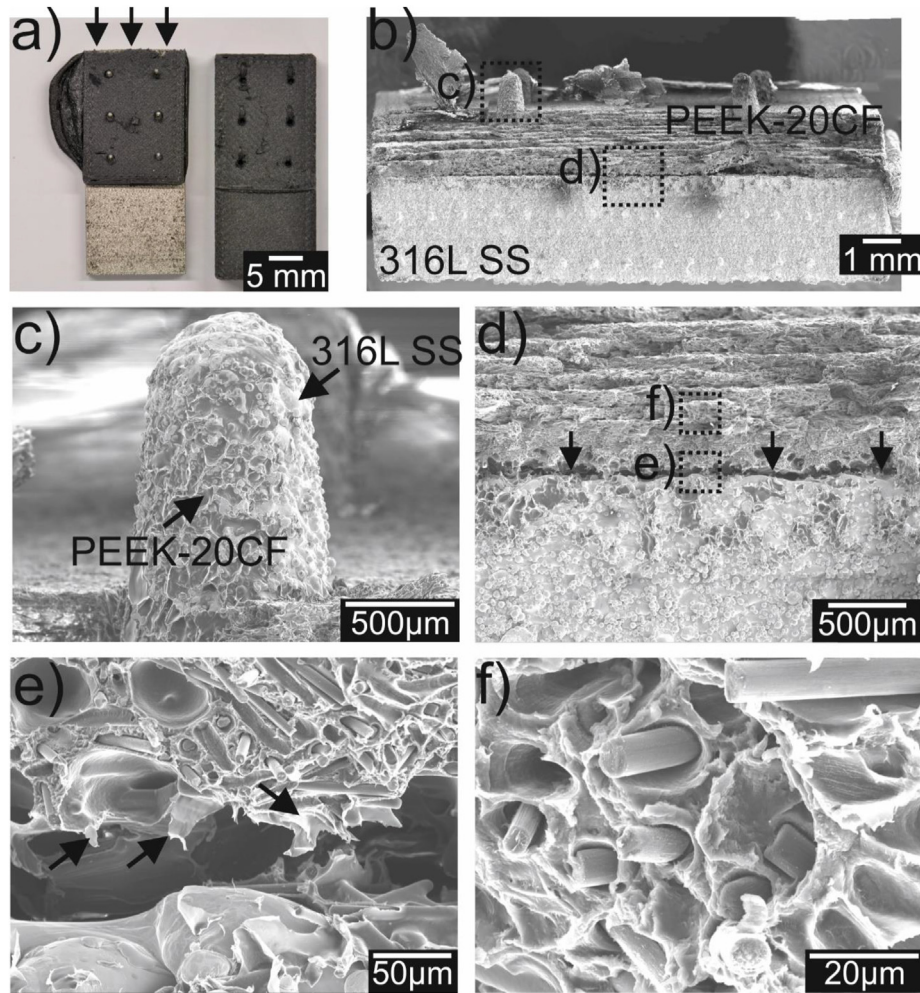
a) Fractured U-Joint after 1 million fatigue cycles and subsequent quasi-static lap shear test; b) SEM overview of a fracture surface; c) – f) detailed view of the fracture surface.
